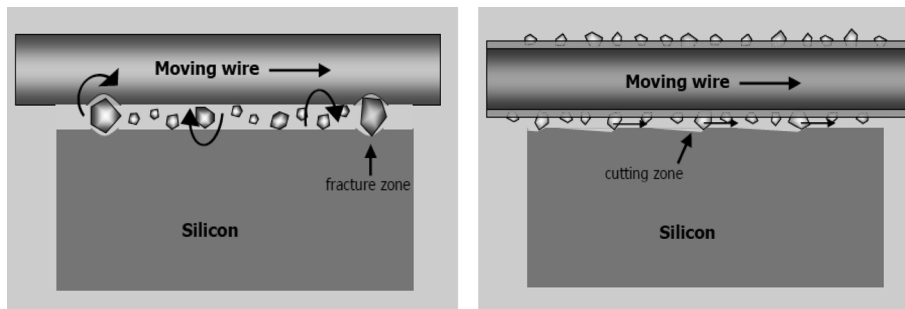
Wire-sawing methods (a) slurry sawing (b) diamond sawing[14].
